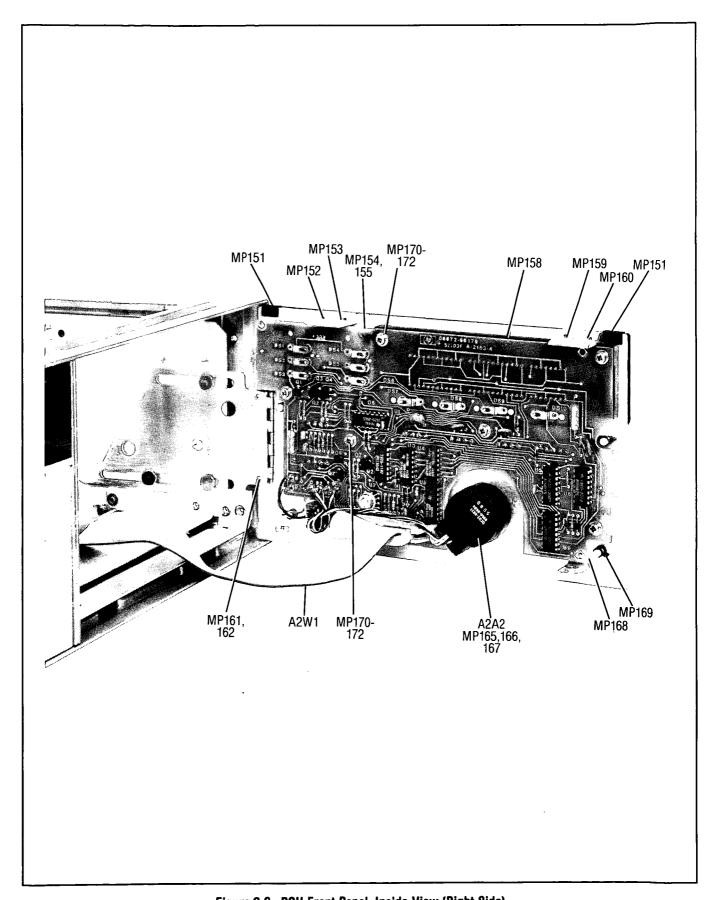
DCU Front Panel, Inside View (Right Side)
